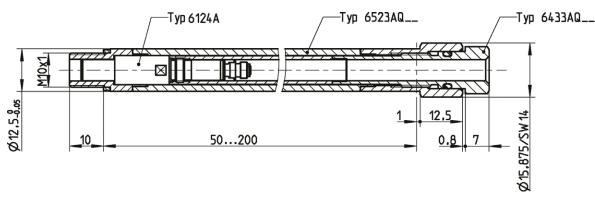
Mounting sleeve type 6523AQ with M10x1 pressure fitting type 6433AQ
